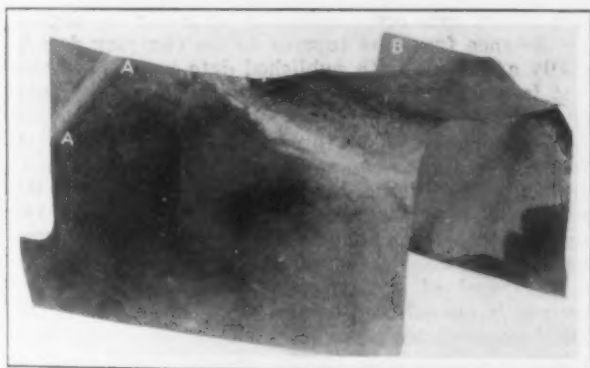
Small Pieces Welded to Corners of Cowl at A and B in 5 Min., and Effecting Considerable Saving in Material
